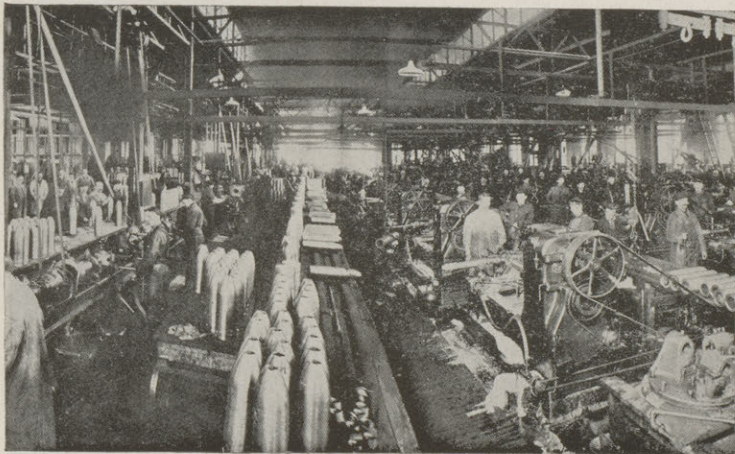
Steel & Radiator Co's., 6 in. Shell Shop, King Street Plant.
